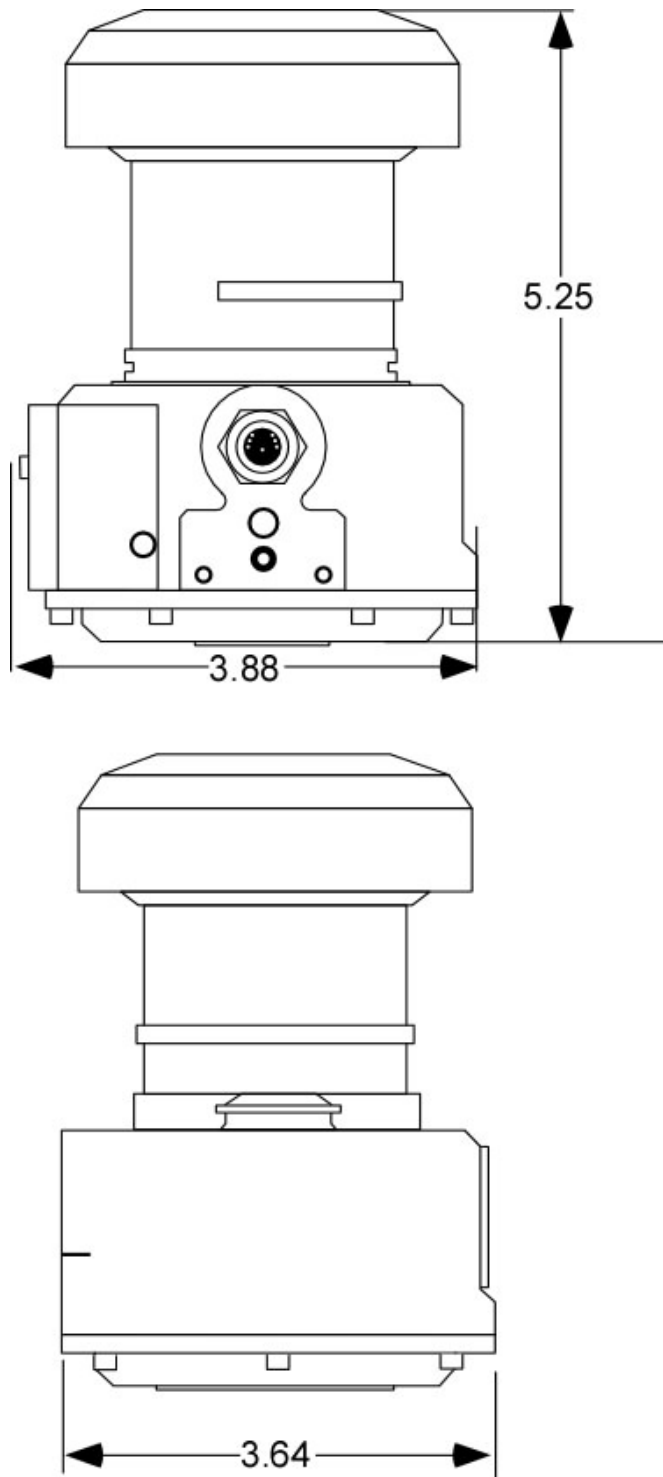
Sensor Assembly Outline Dimensions (PN 6455000)
